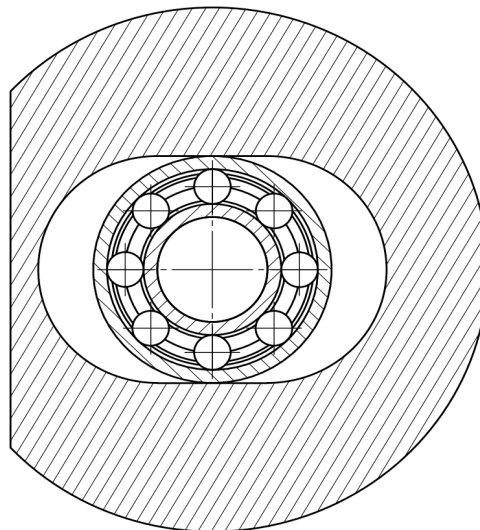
Section “A-A” indicated in Figure 6: the ball bearing outer ring seated in an oblong limits the movement of the mechanism to just one plane.
